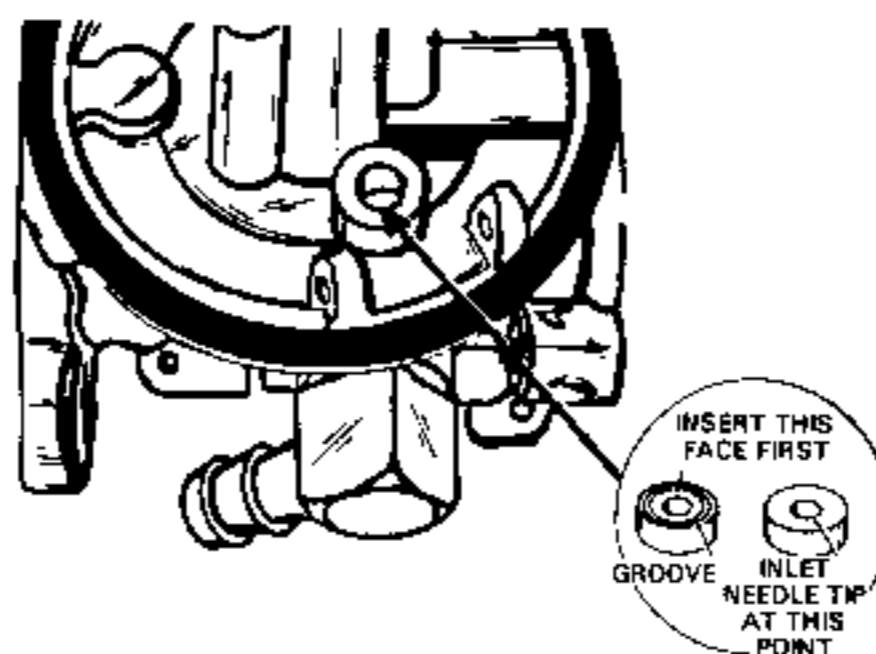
Fuel inlet needle seat must be installed with grooved side against carburetor body. Refer to text.
